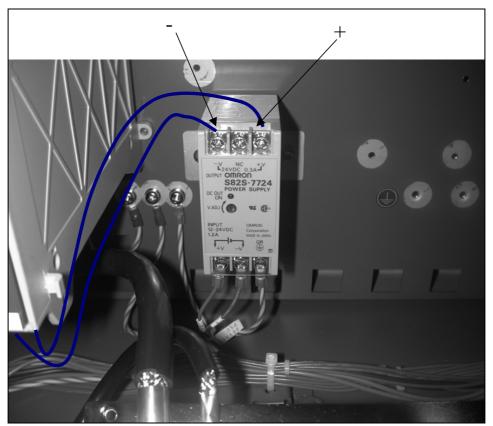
(k) Connection of ROBOWELD iC/H2 (PowerWave 455M/STT) (4/5)
